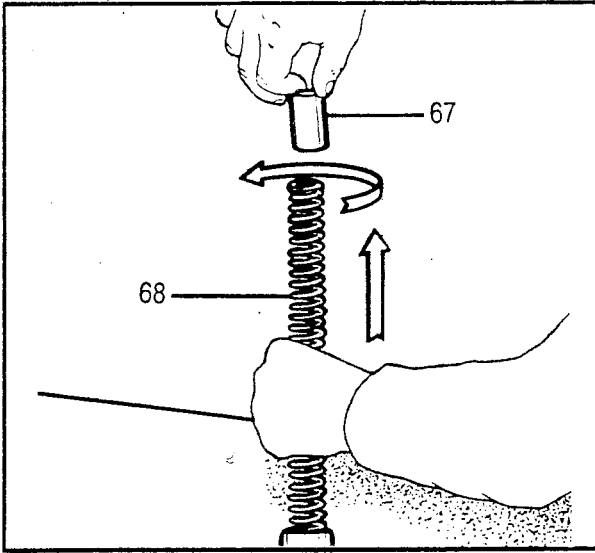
Fork Spring/Pre-load Sleeve Removal
